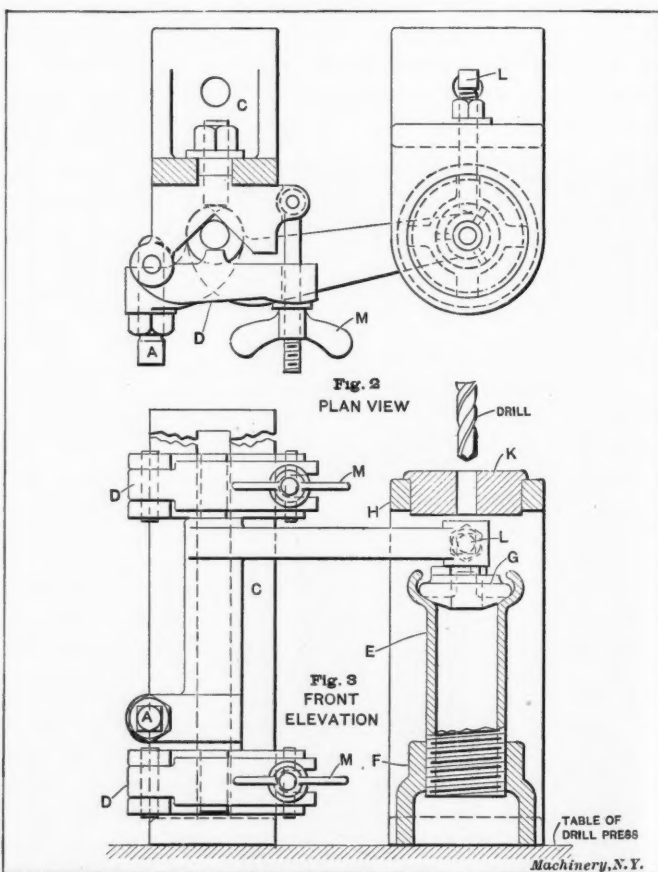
Plan View of Fixture used in Drilling the Lever shown in Fig. 1. Fig. 3. Front Elevation of Drilling Fixture showing Method of Supporting the Levers
